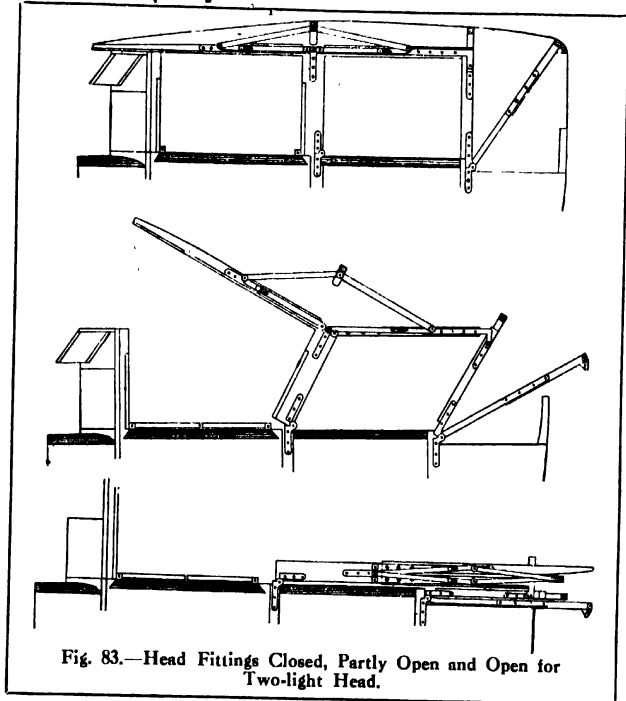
Head Fittings Closed, Partly Open and Open for Two-light Head.
